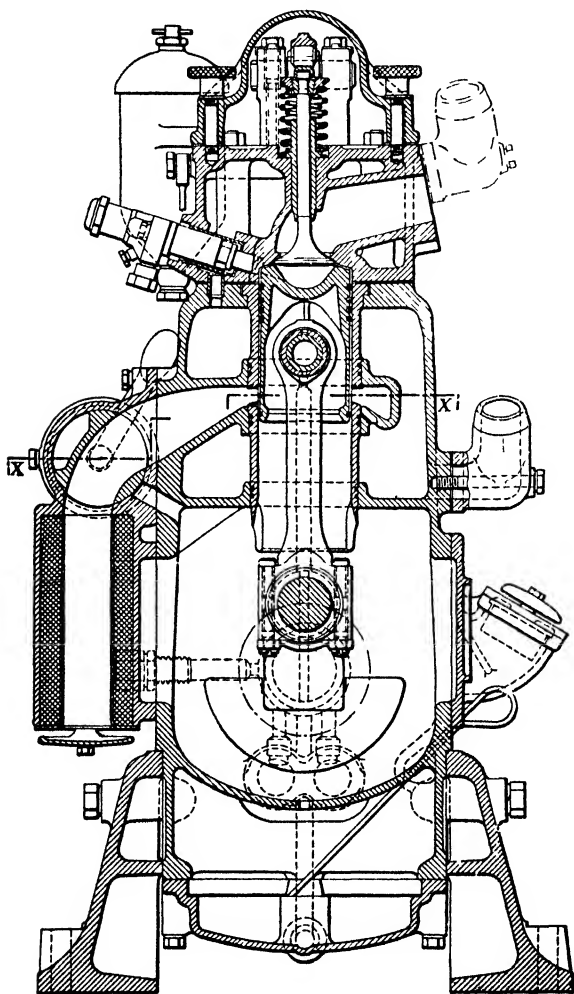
CROSS SECTION OF KADENACY SINGLE-CYLINDER ENGINE.
